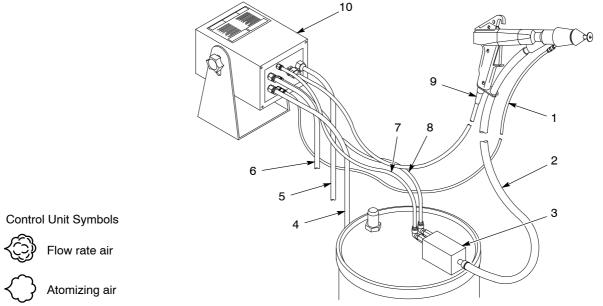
Gun Installation: Feed Hose, Air Tubing, and Cable Connections
